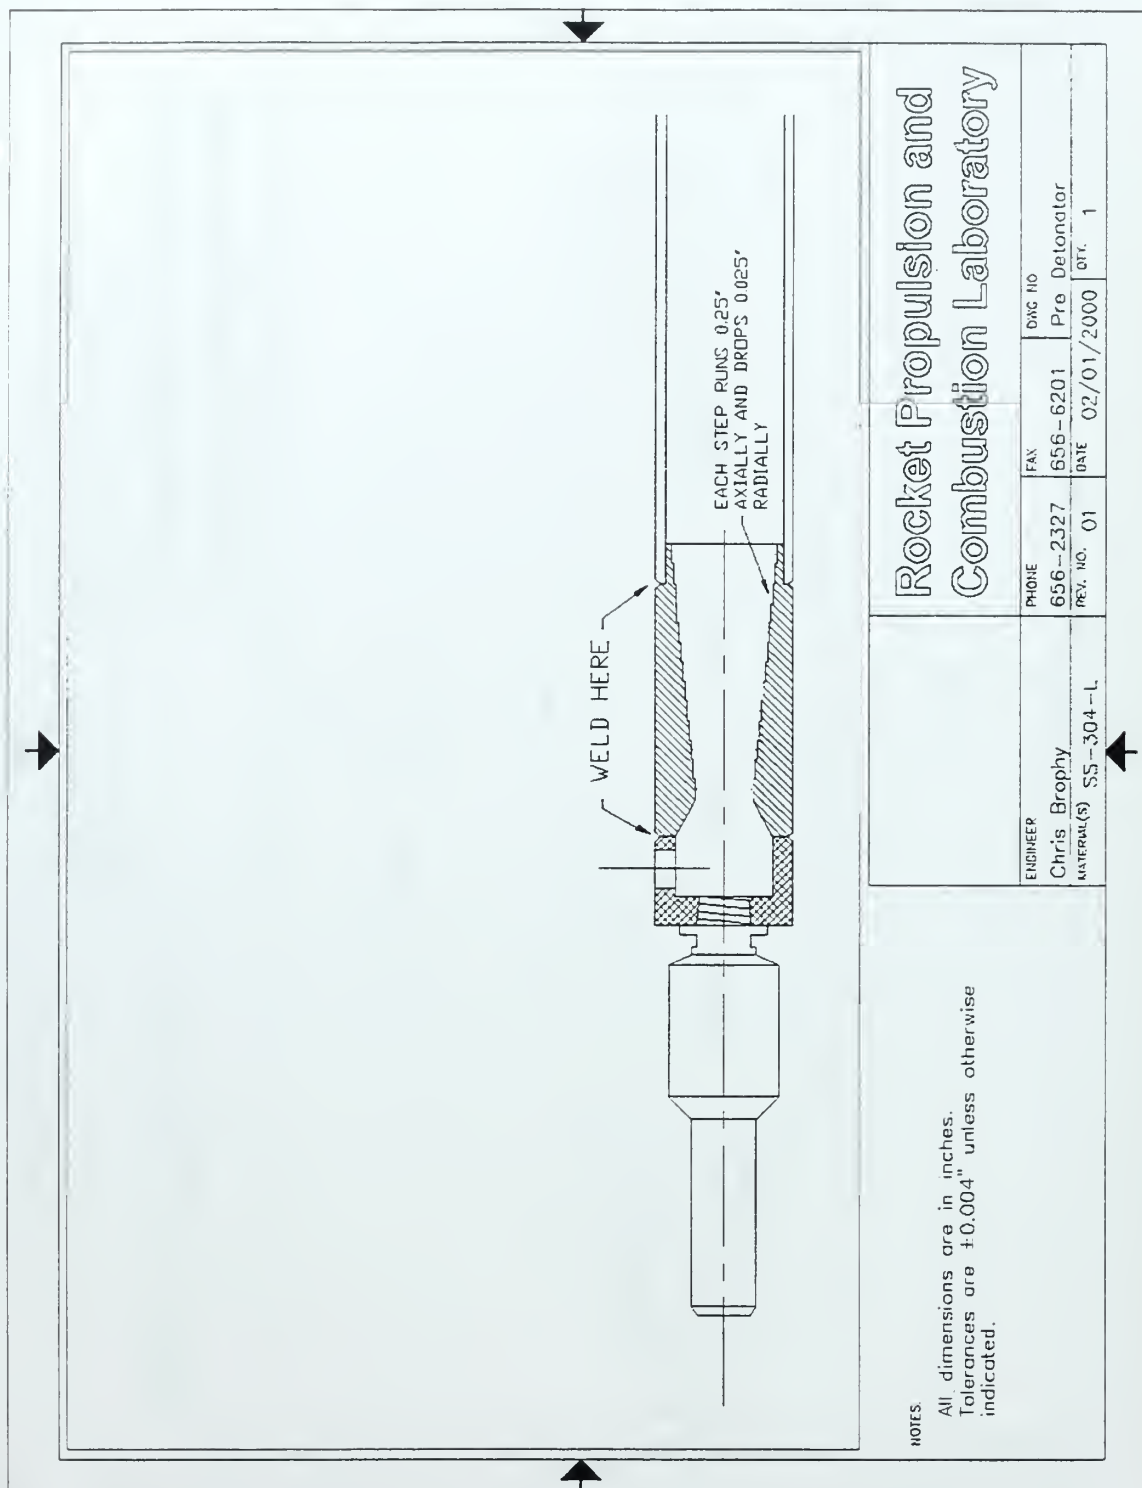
This drawing depicts the pre-detonation tube that was welded to the manifold flange just prior to the main combustion tube.
